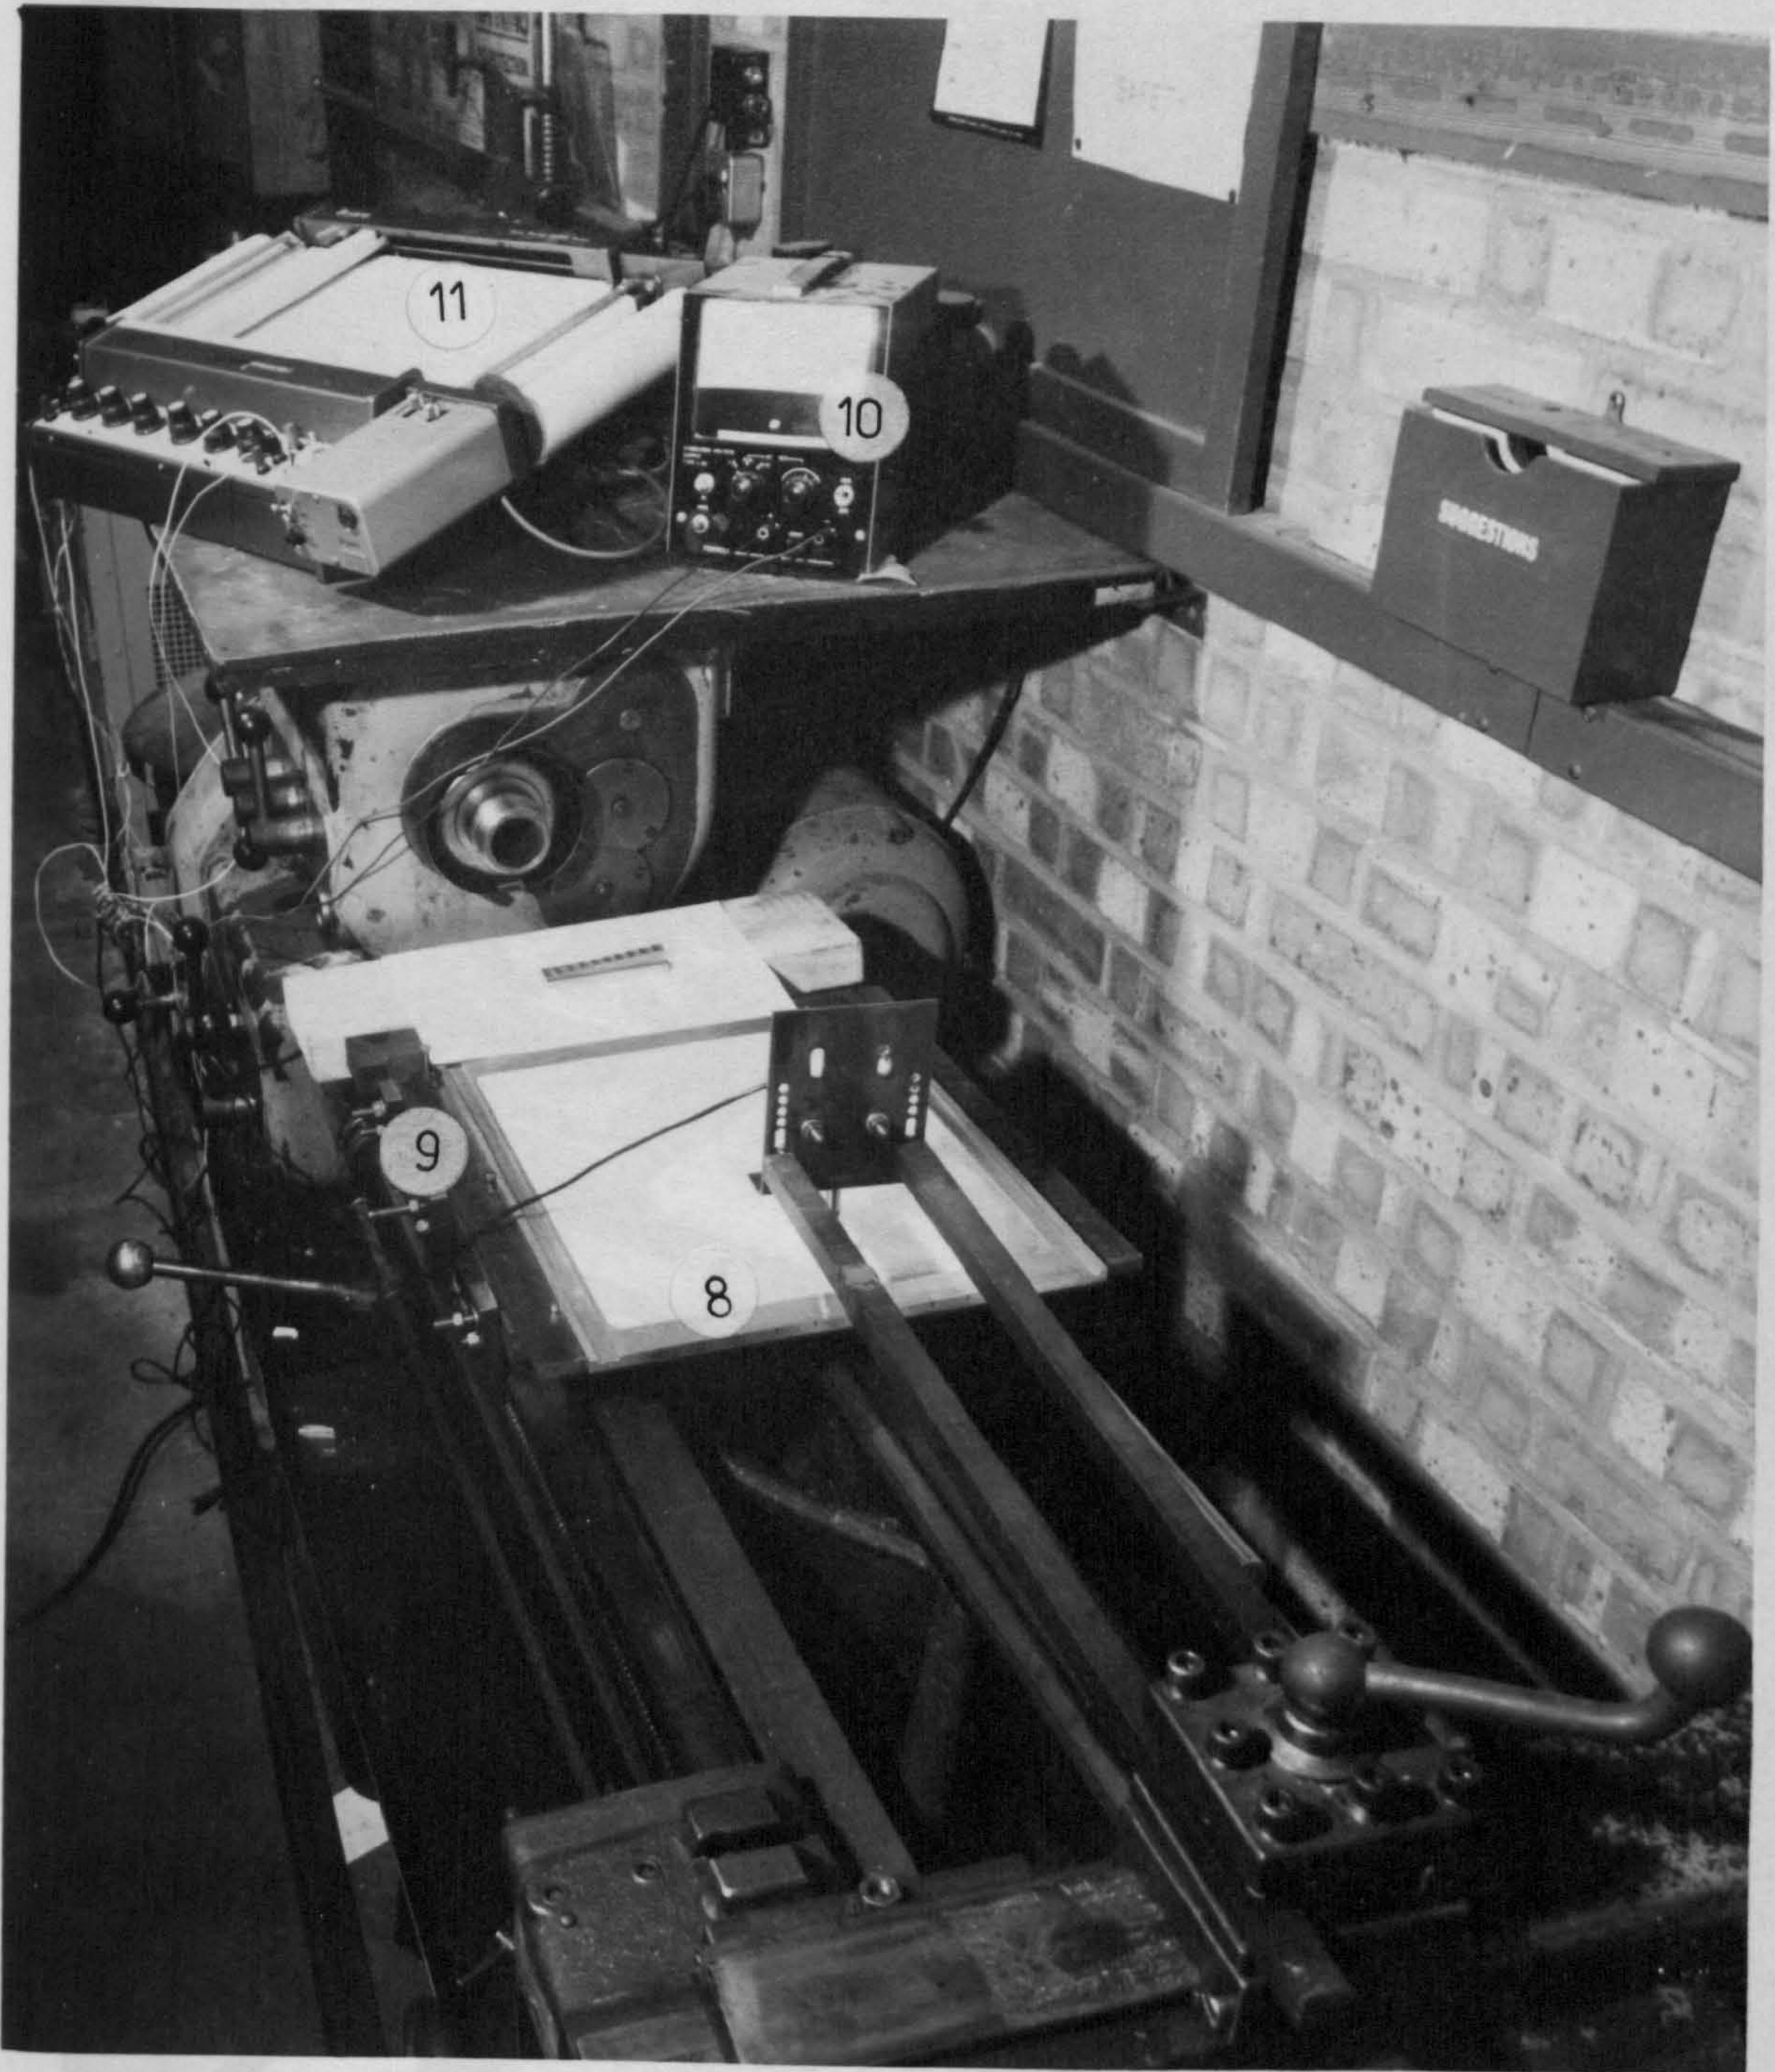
GENERAL VIEW OF EQUIPMENT FOR SURFACE PROFILE MEASUREMENT
